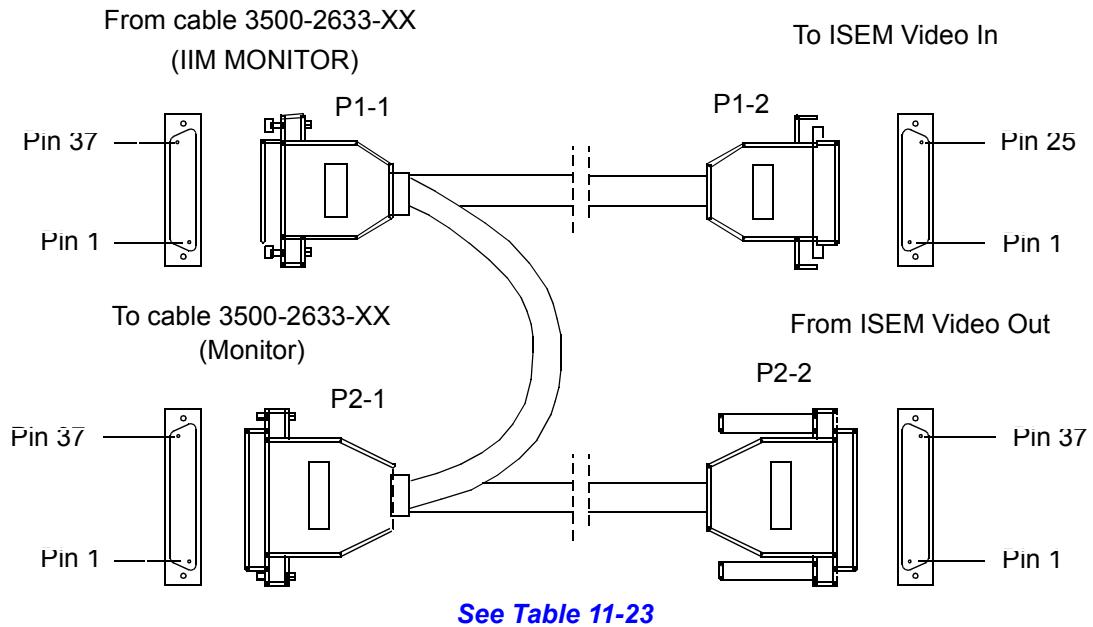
IIM to UIM Cable Assembly (P/N 3500-2771-XX)
